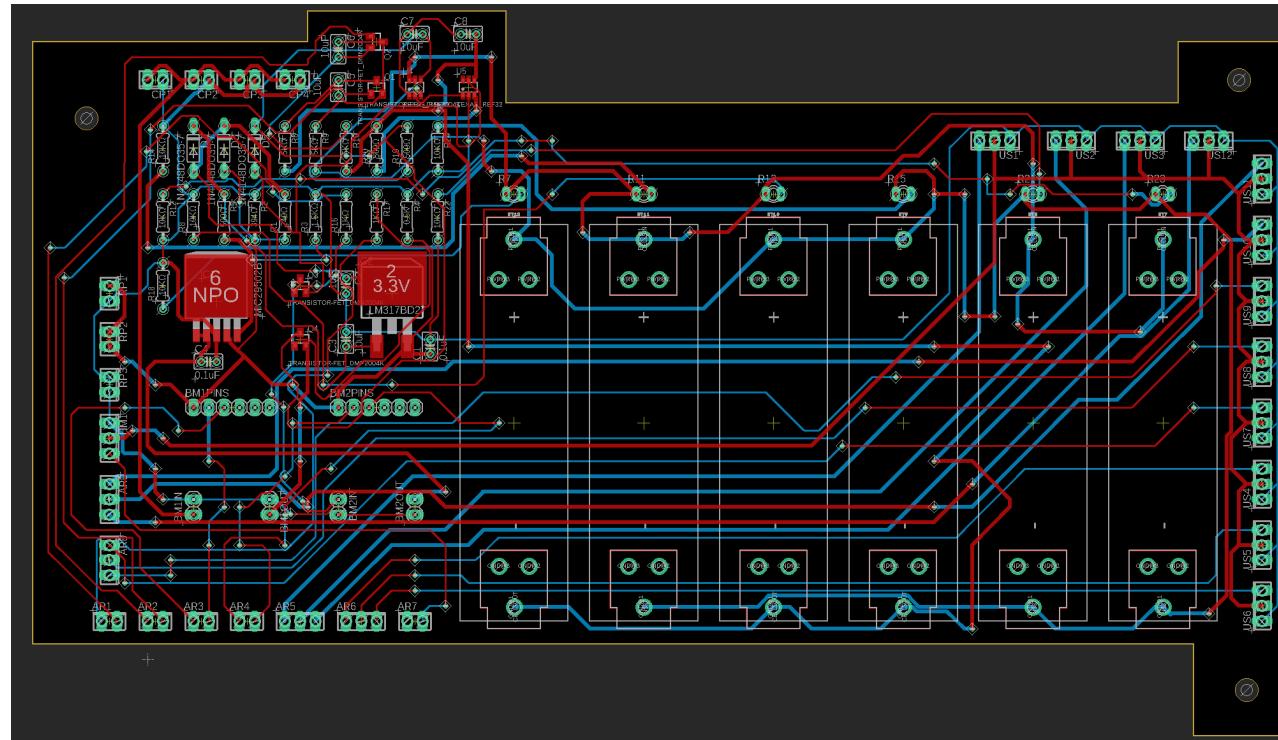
Board view of the Power PCB. Available in: X Drive -> Mech Eng-> Final year Projects -> GBDP 2020 -> G-14 CERN Robotics -> Design Freeze-> Integration -> Robot Technical Drawings
